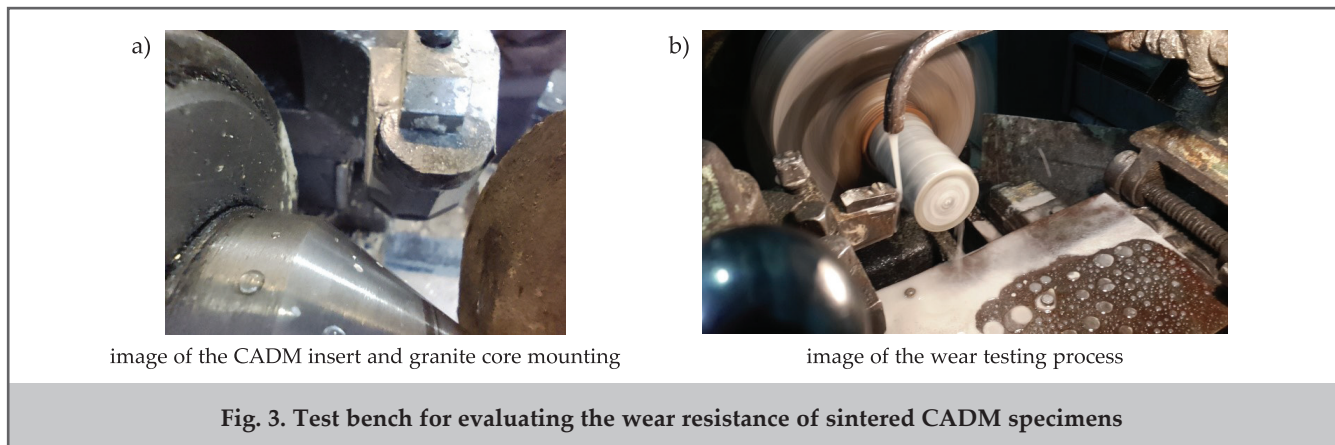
Test bench for evaluating the wear resistance of sintered CADM specimens
